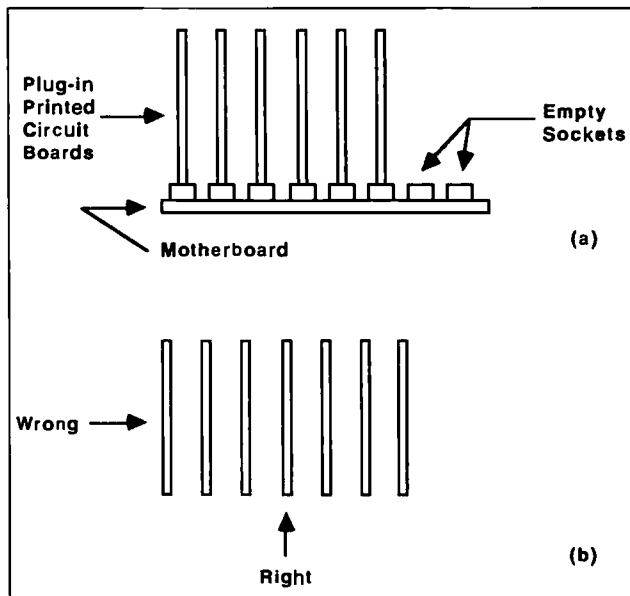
a) Several printed circuit cards mounted in sockets on a motherboard; b) right and wrong ways to direct air over the printed circuit cards.
